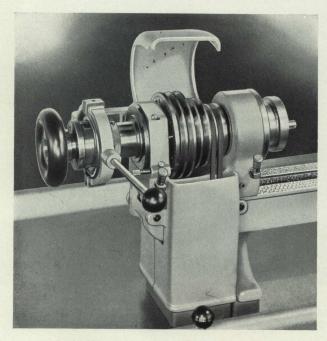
Model No. 7 Headstock (Model No. 5 same except 3-step cone pulley arranged for single flat-belt drive)
